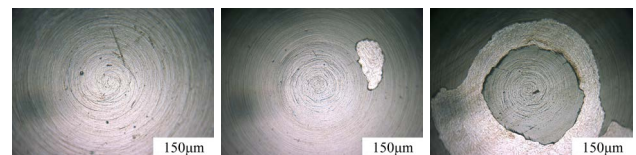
Wear behavior of DLC coated tool for each burnishing length
